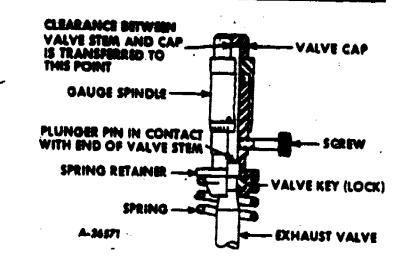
Using SE-1733 Valve Gauge for Checking Cap Clearance with Valve Installed.
